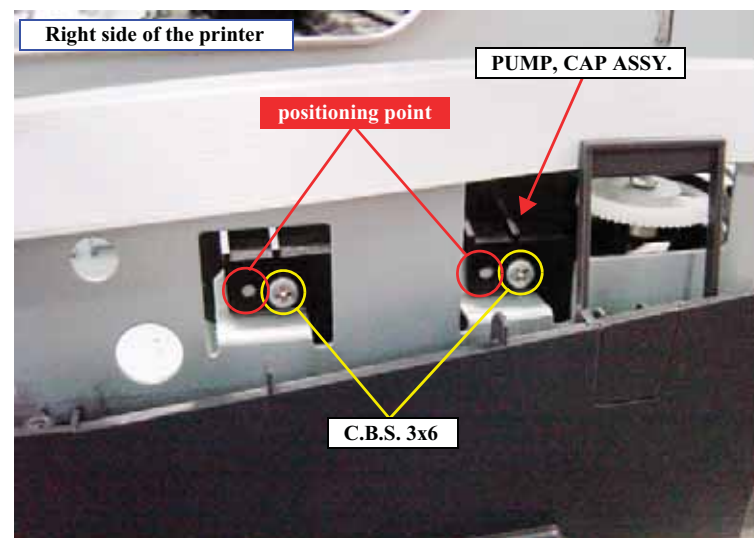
Removing the screws from the PUMP, CAP ASSY.
